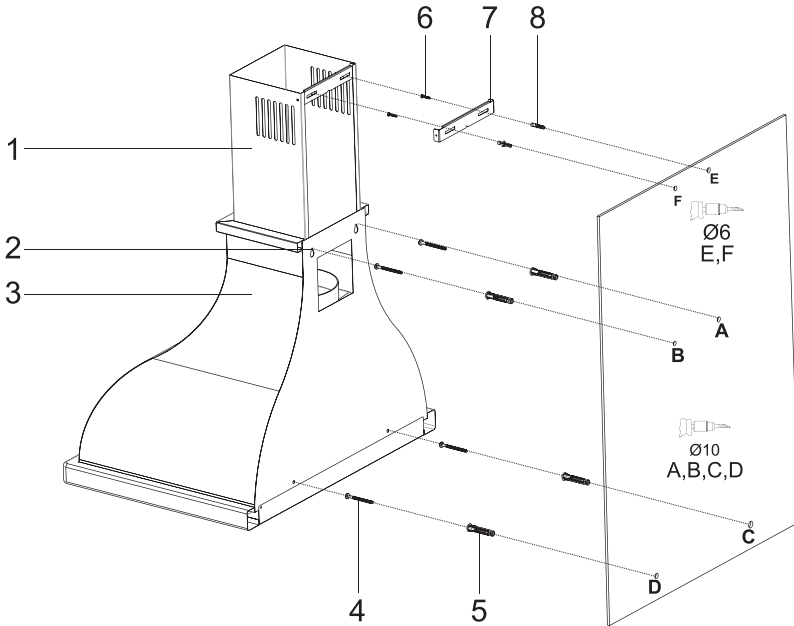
ASSEMBLY INSTALLATION AND COMPONENTS
